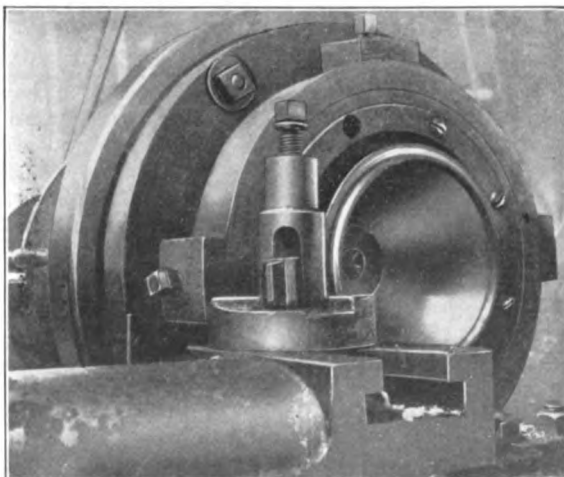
MACHINING THREAD AND FACING ADAPTER
